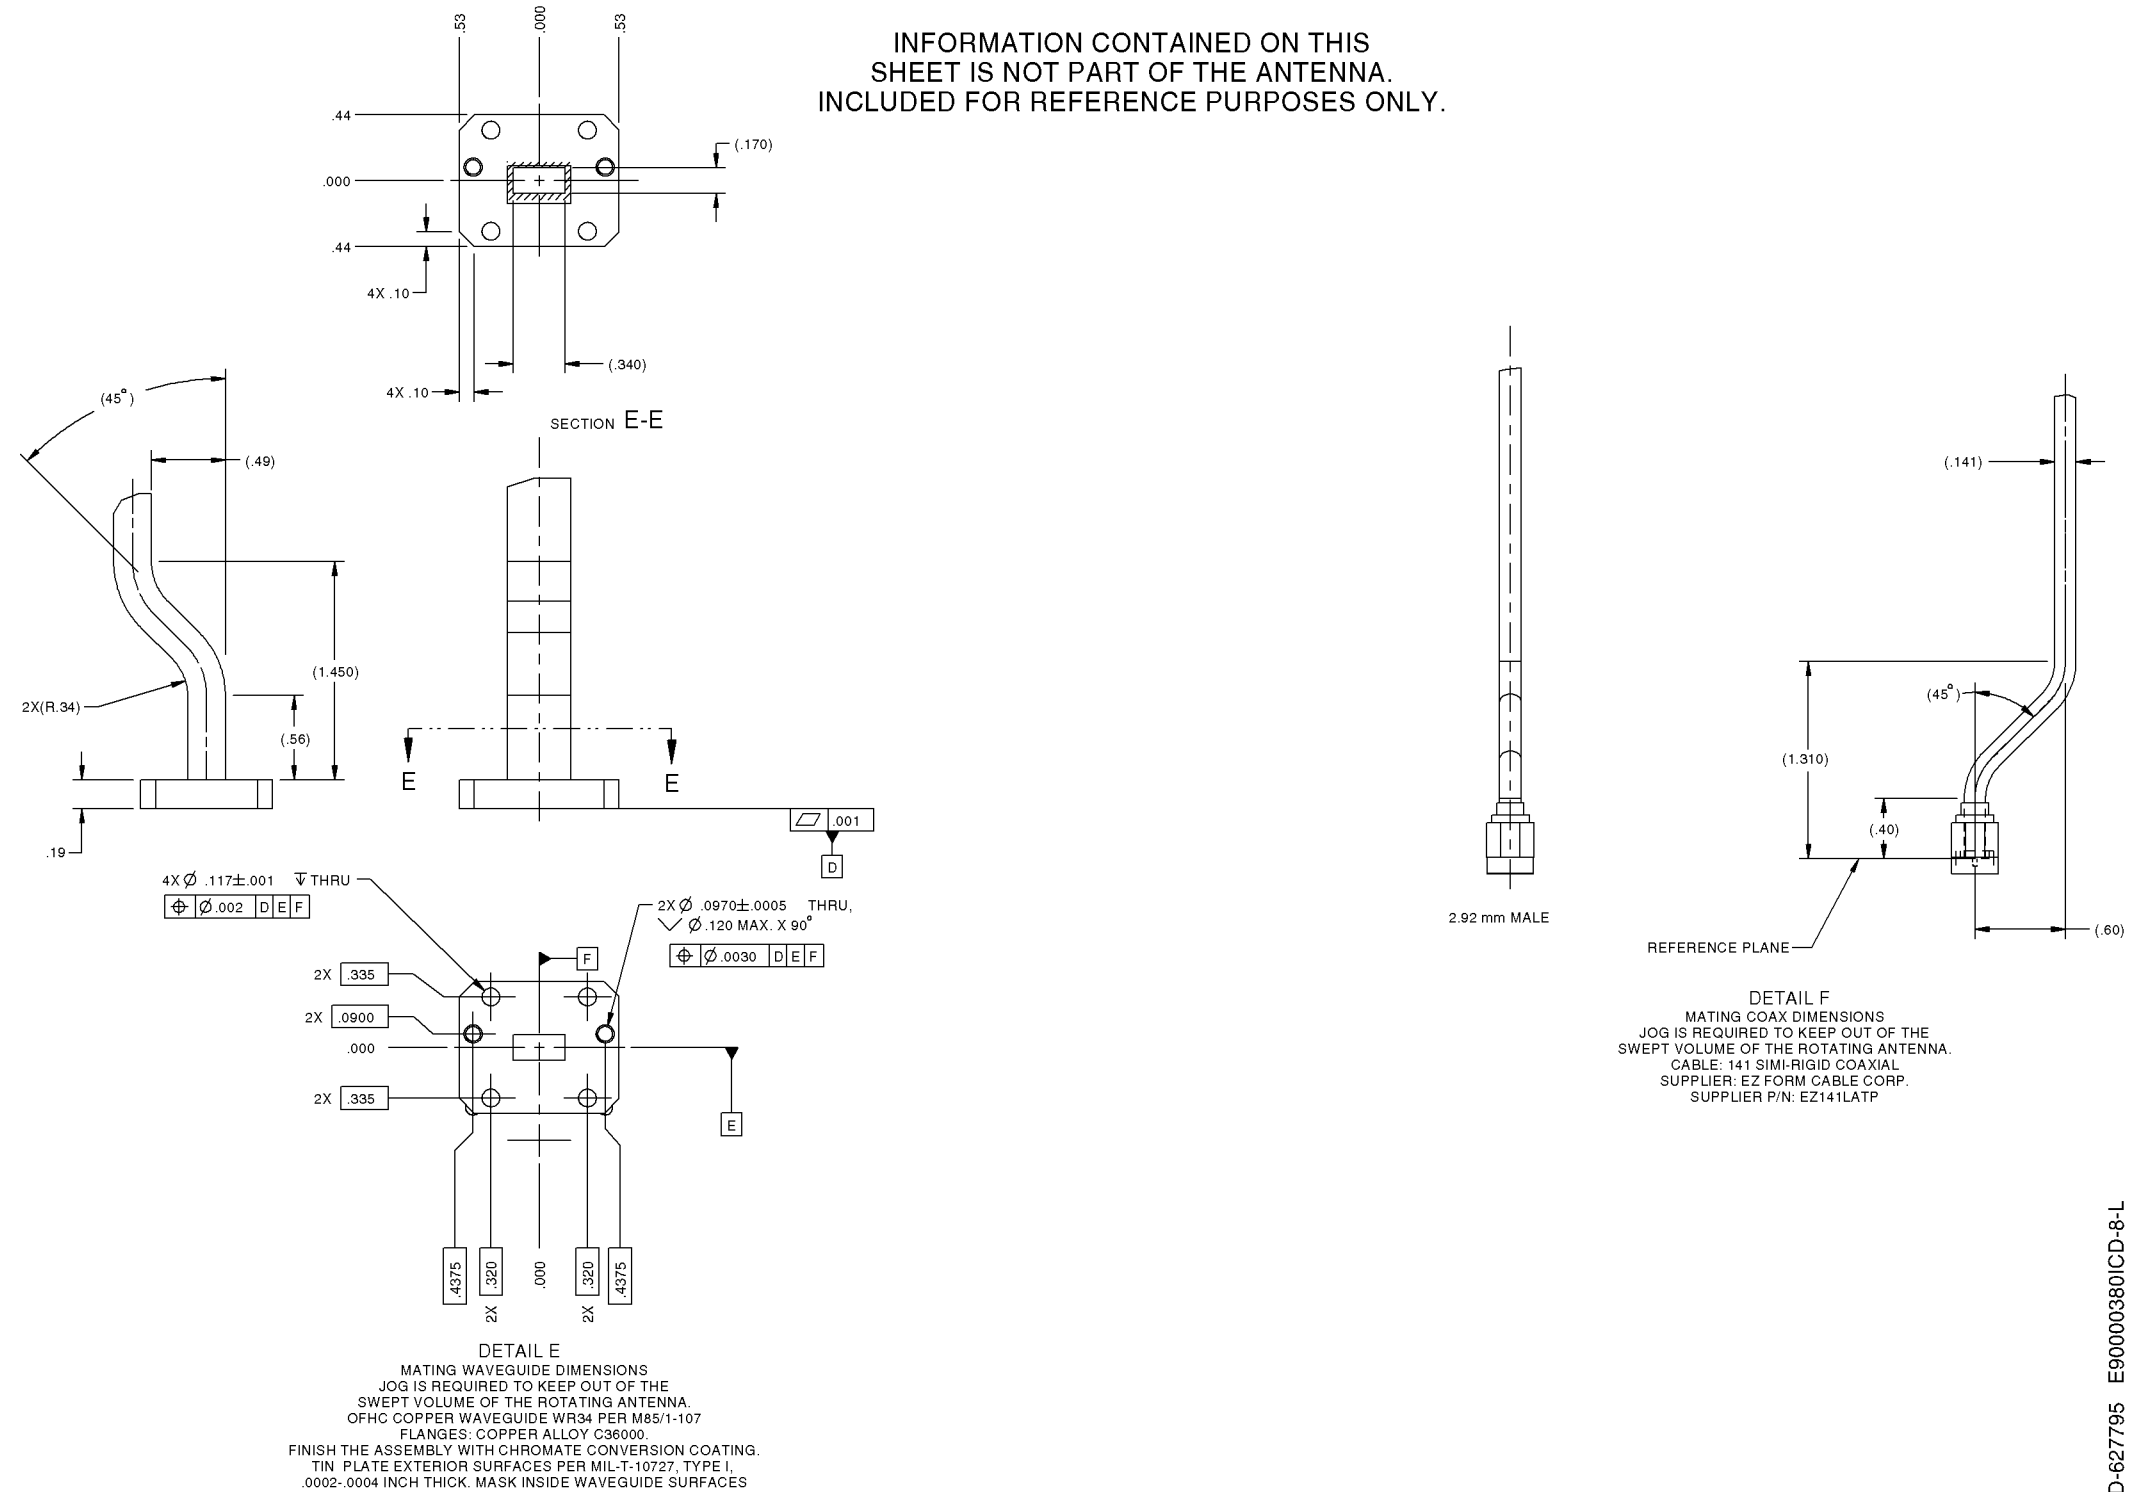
(Sheet 8 of 14) FMA Outline and Installation Drawing (90000380ICD, REV L)
